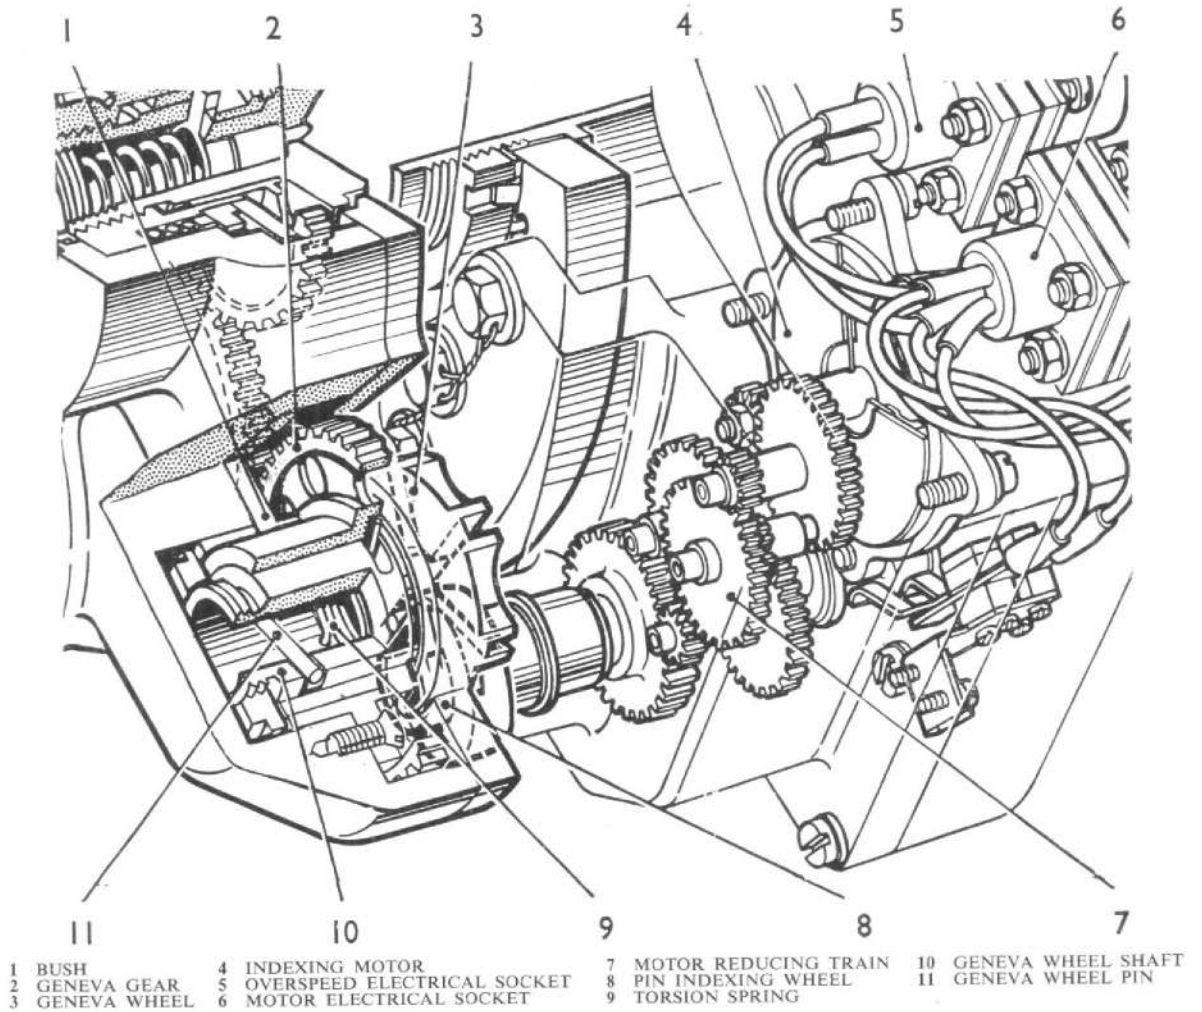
Sectional perspective view of indexing motor and reduction gear train
